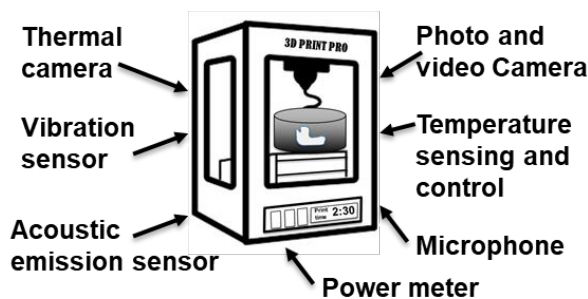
An example of many sensors that can be mounted in a material extrusion 3D printer.
